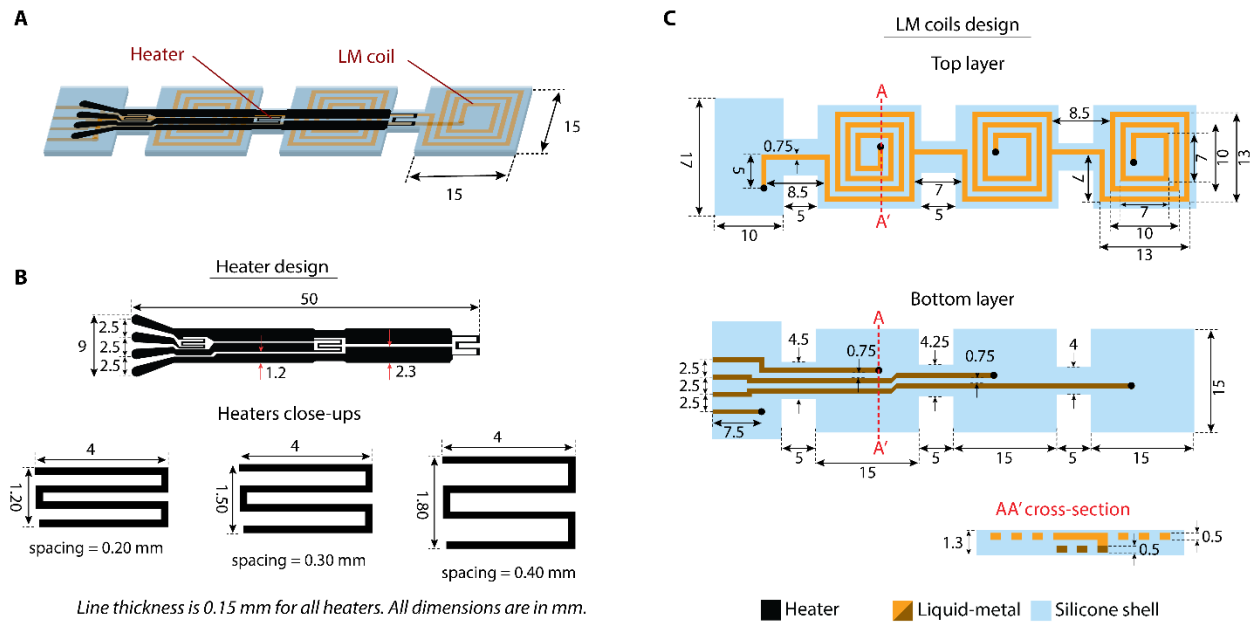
Design parameters of the segments, heaters, joints, and liquid-metal coils. (A) Perspective view of the device showing the overall structure design and dimensions of the segments. (B) The dimensions of the heaters and conductive traces, and the close-up of each heater. (C) The design and dimensions of the liquid-metal coils.
